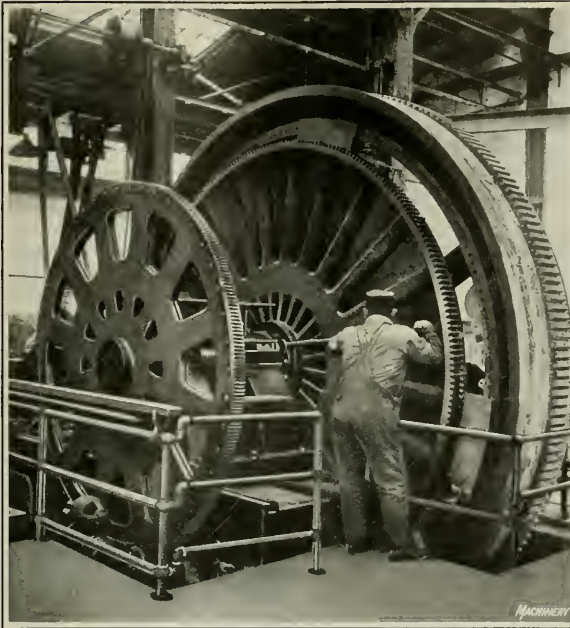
Rear View of the Planer shown in Fig. 2. Note Large Dividing Wheel at Left-hand End of Work-spindle
